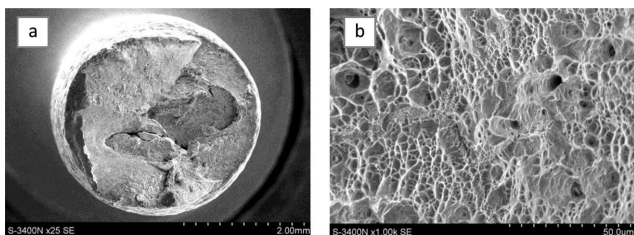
Steel 1 after dynamic tensile tests, a) view of the surface of the sample, b) ductile fracture surface with a fine crater structure
